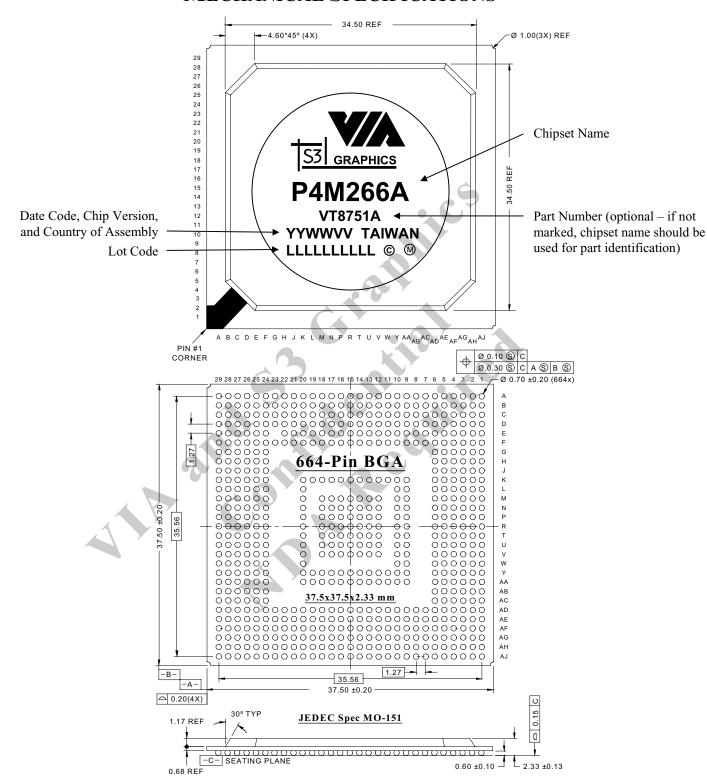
Mechanical Specifications - 664-Pin HSBGA Ball Grid Array Package with Heat Spreader
